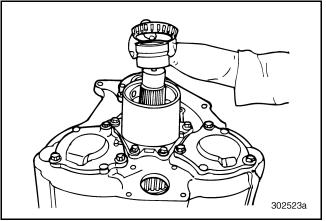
Installing Spacer and Outer Bearing Cone (T313L21/T318L21 Shown)
